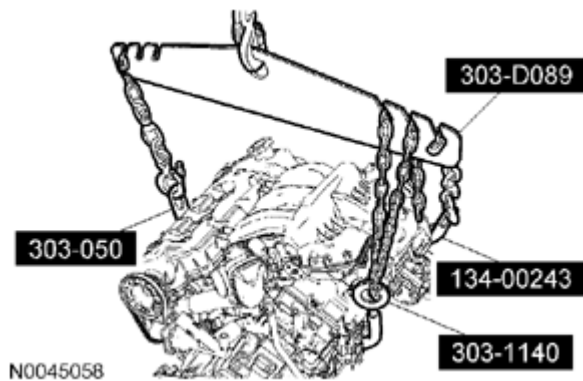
Aligning Transaxle To Engine Using Special Tools
